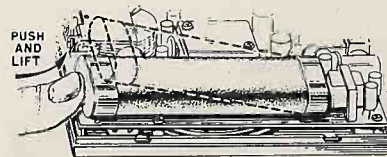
View Showing Method of Removing Battery Holder from Chassis Board.
